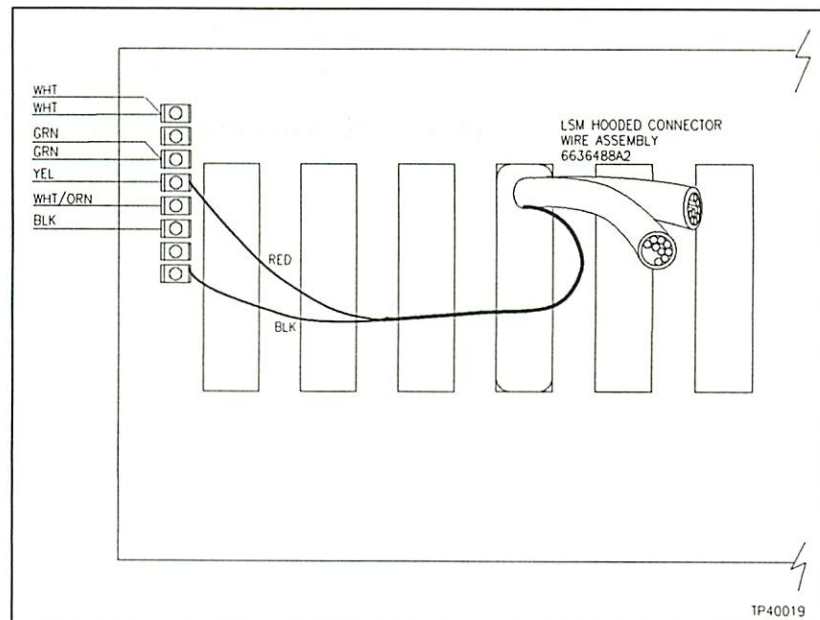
Module Mounting Unit - Back View Wiring Connections
